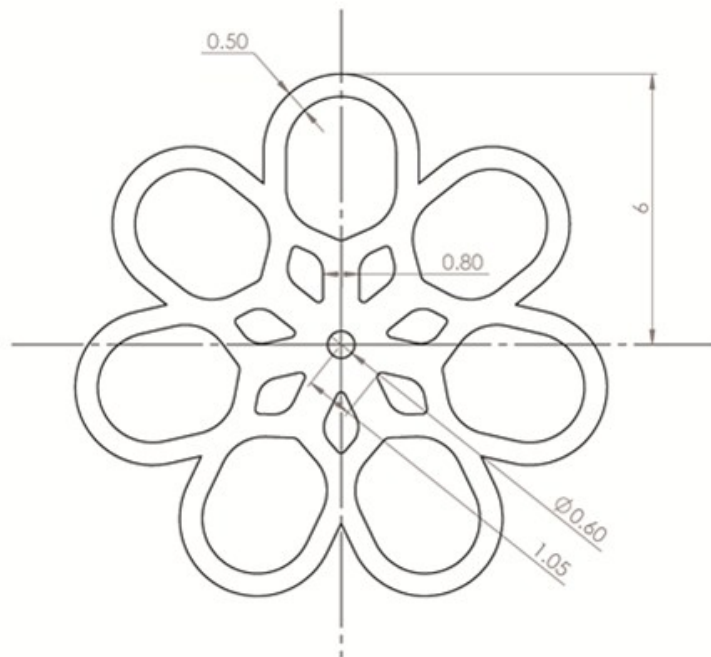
Drawing of the flower-shaped thrombectomy device designed in SolidWorks (dimensions are in mm).
